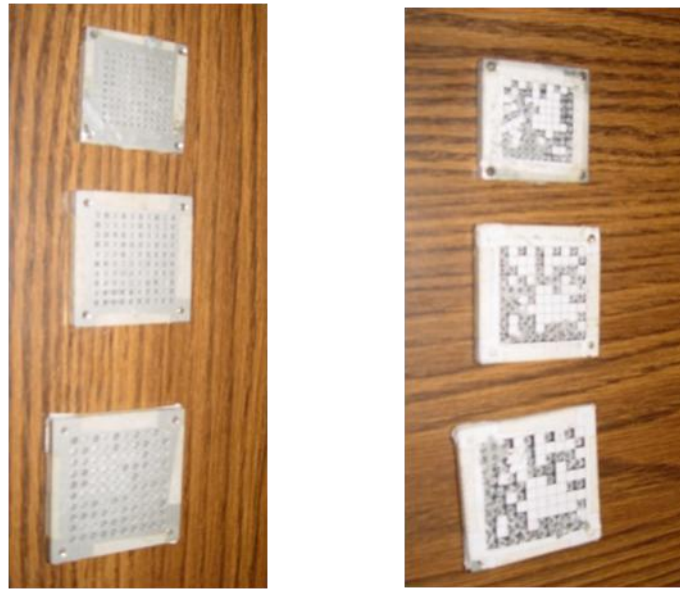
Jigs used to machine sand drag with Data Matrix symbol for Experiment One. Left image shows holes in jig, while the right image shows the symbol indicated location of contrast marks that guided the drilling process.
